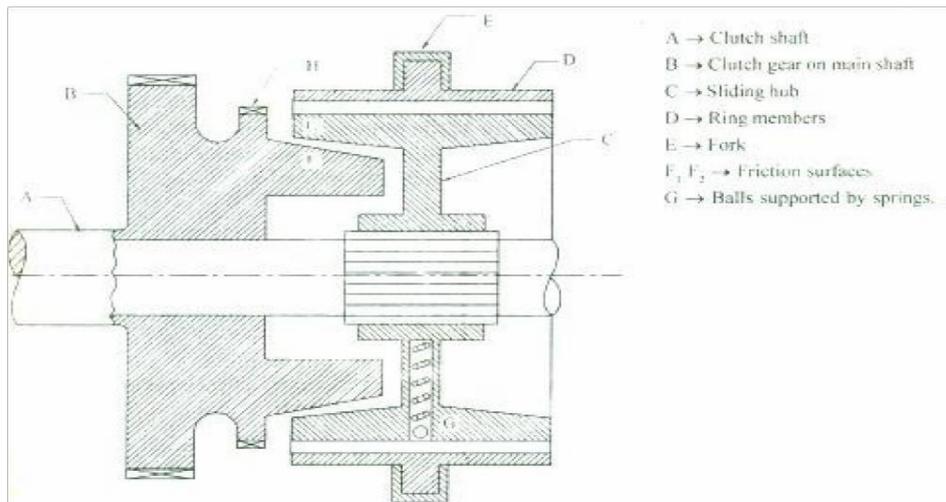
Synchronismesh device on higher gear side in a gear box.
